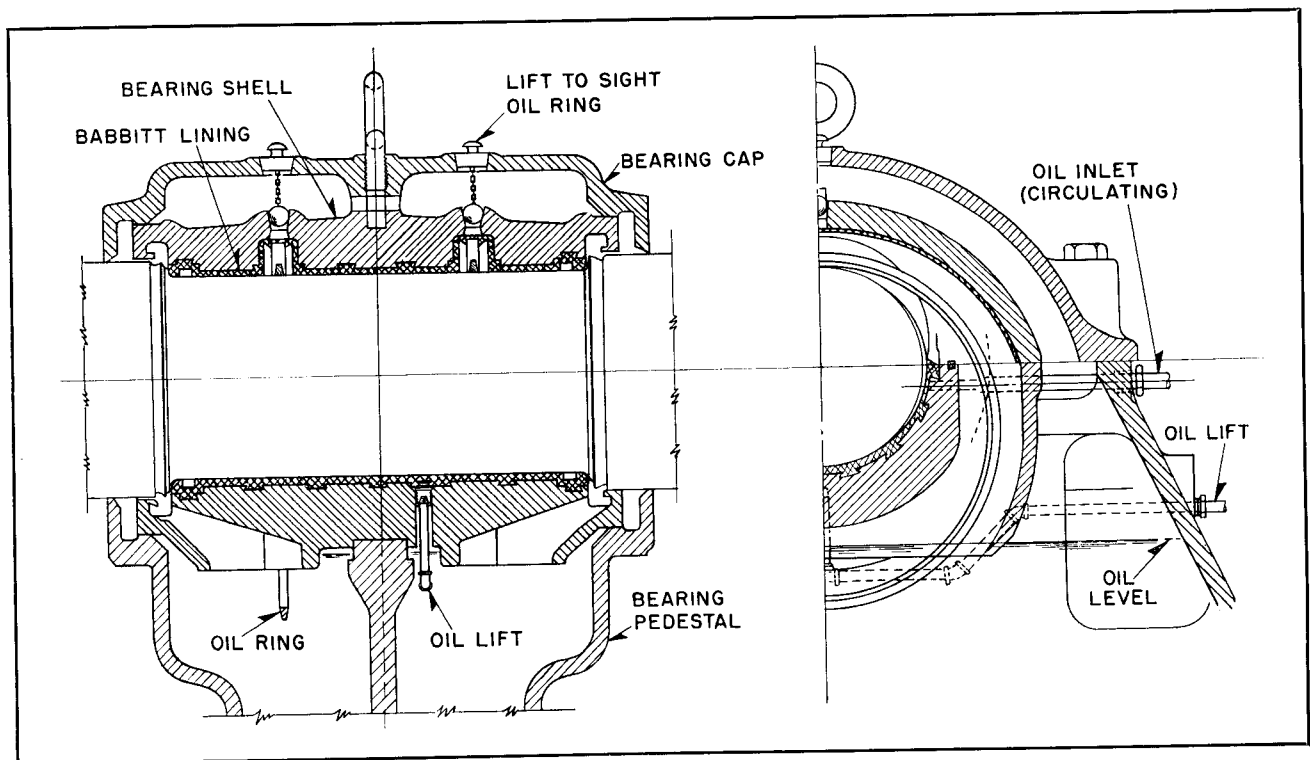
Cross-Section of Typical Sleeve-Bearing Assembly
